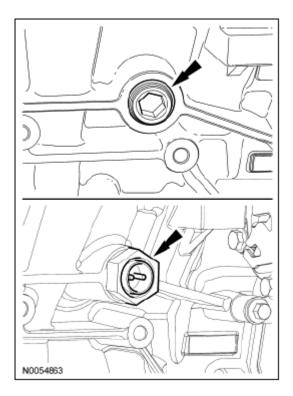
Locating RH Cylinder Block Drain Plug Courtesy of FORD MOTOR CO.
